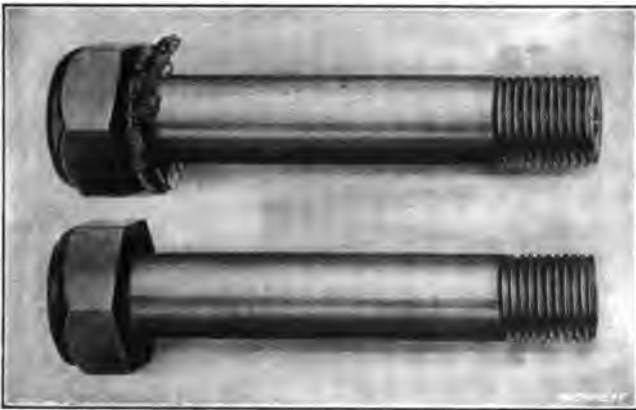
Electrically Butt-welded Cap-screw
